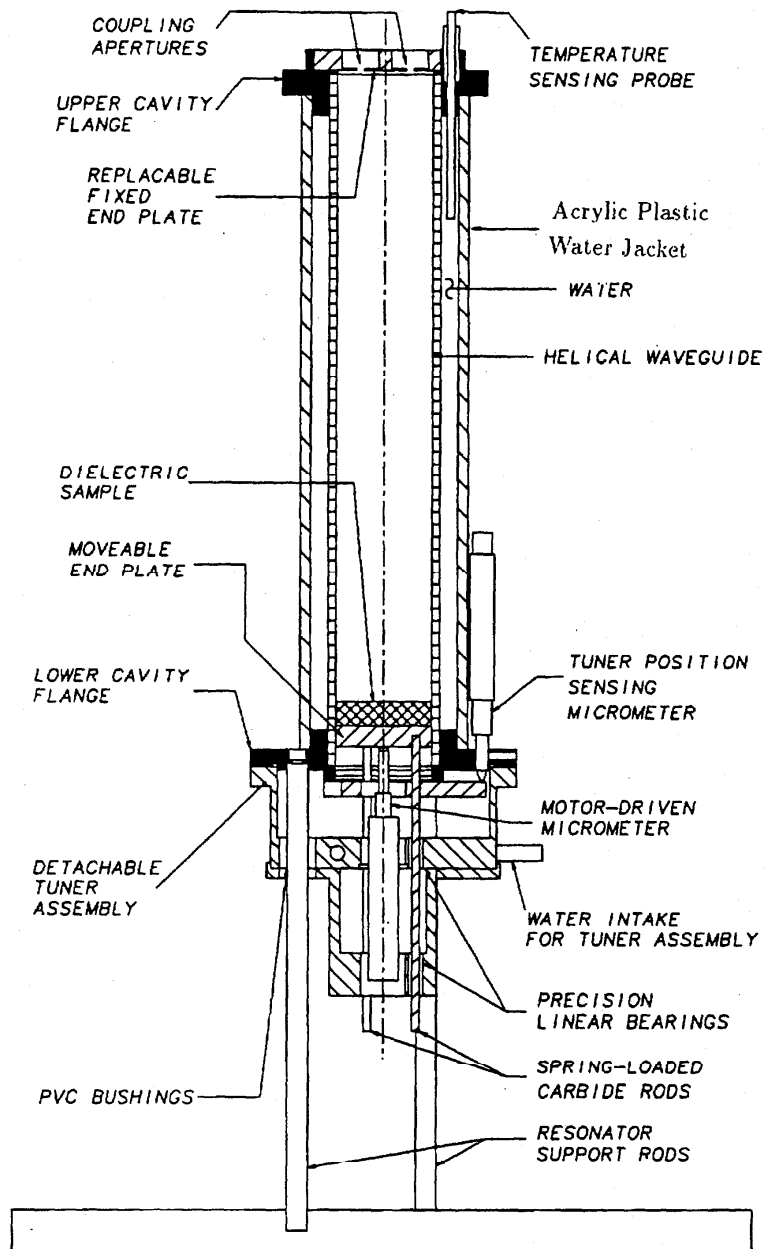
Cutaway assembly drawing of NIST cavity resonator.
